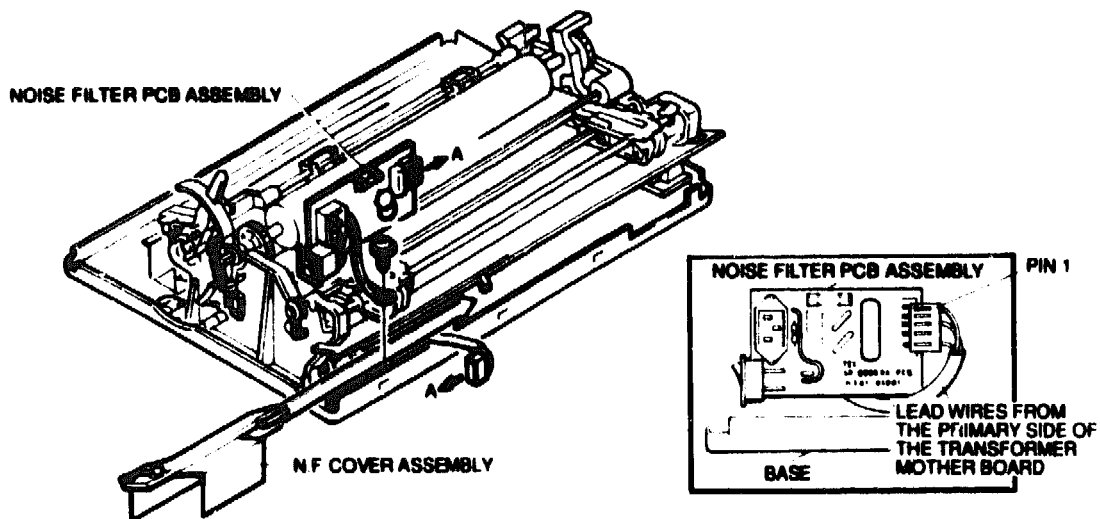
Removing and Replacing the Noise Filter PCB Assembly
